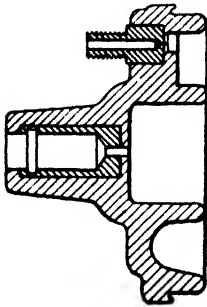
Molded part having two inserts and so designed that ejector pins can be used in either or both top and bottom portions of the mold. In this instance the pins are in line with the inserts and bear against them in the case of those on the hub side of the molding.
